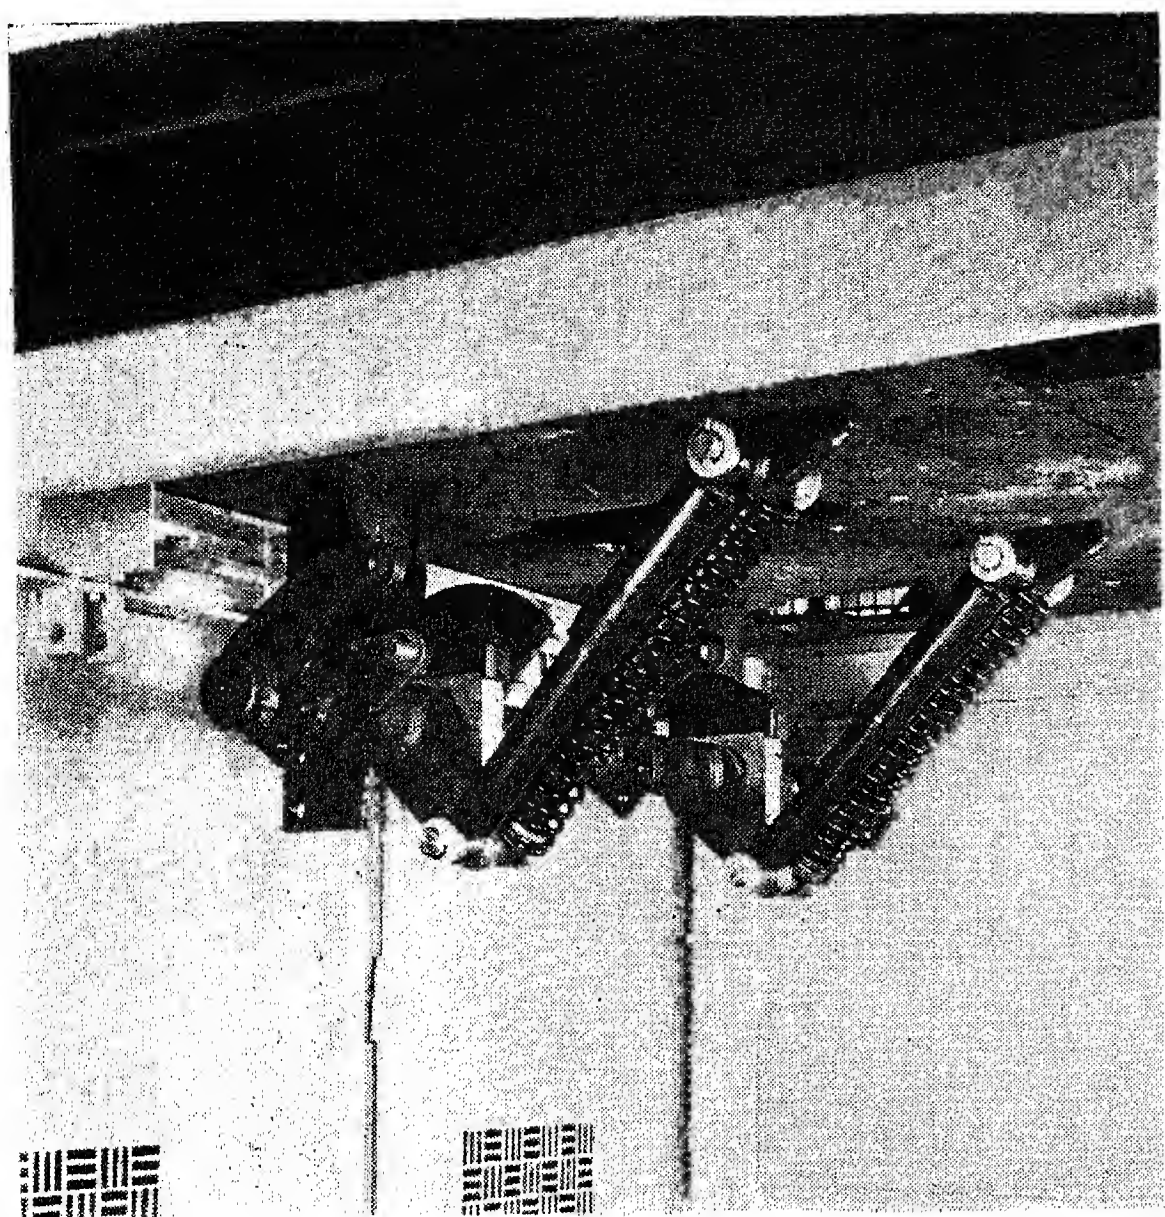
Shock absorber assembly showing mounting of tubular-type shock absorbers
